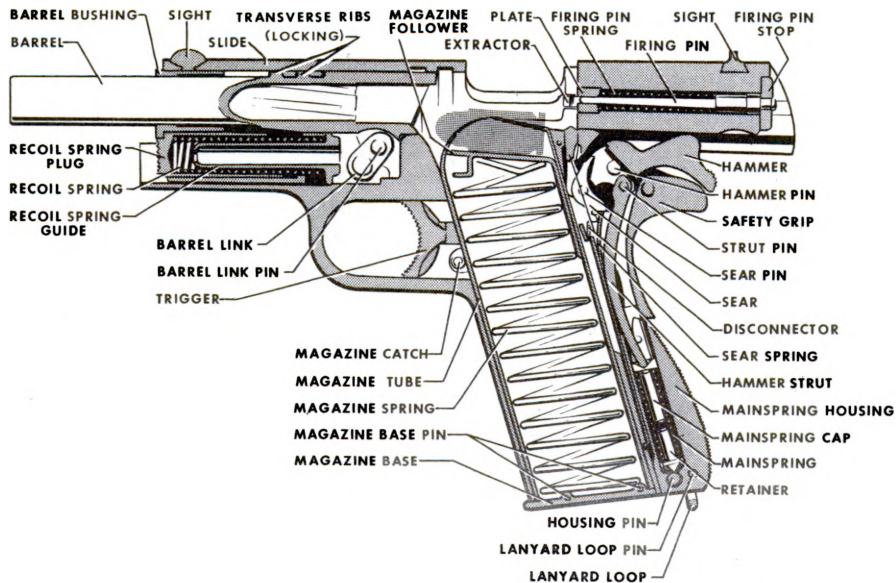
Sectional view of Pistol, Caliber .45, Model 1911A1.
